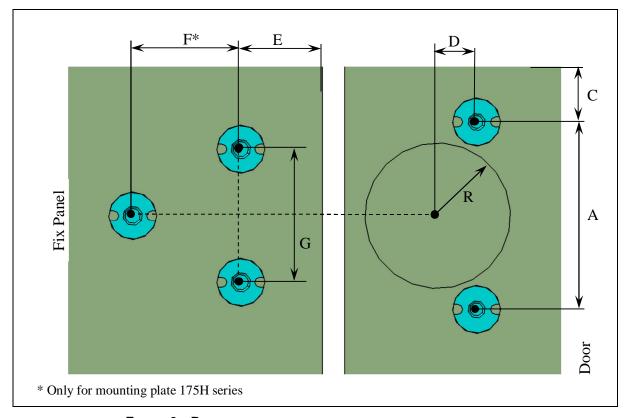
BLUM HINGE AND MOUNTING PLATE INSTALLATION
